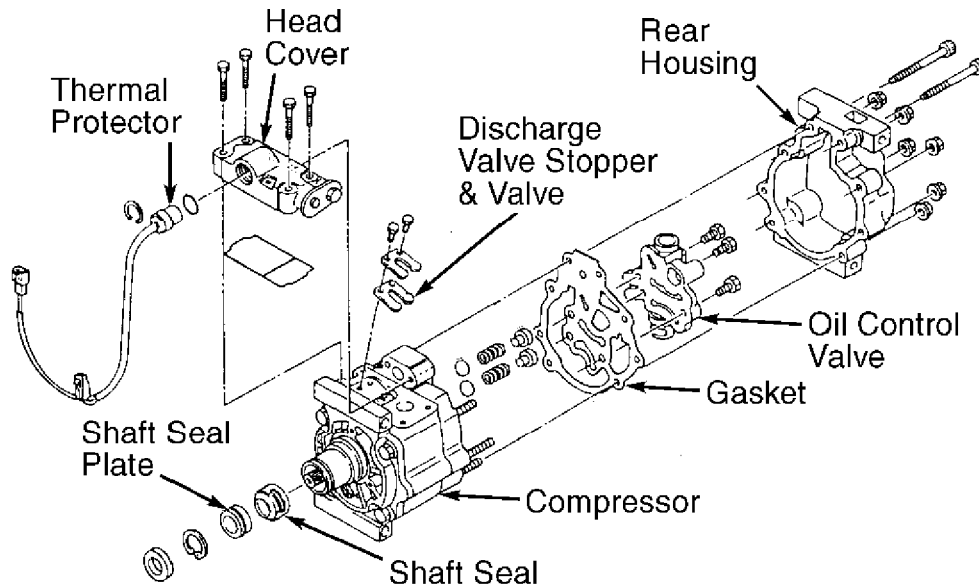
Exploded View Of Compressor (Panasonic Rotary Vane)
